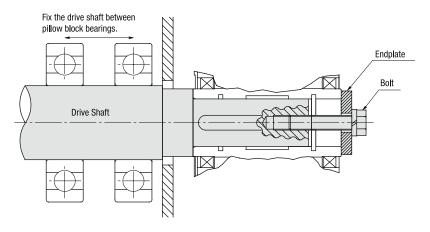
Attachment Using an Endplate (Customers need to provide their own endplates and bolts.)
